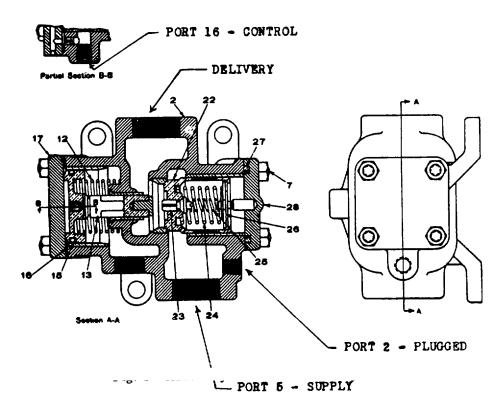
Assembly View - D-1-A Relayair Valve - PORT 5 - SUPPLY
